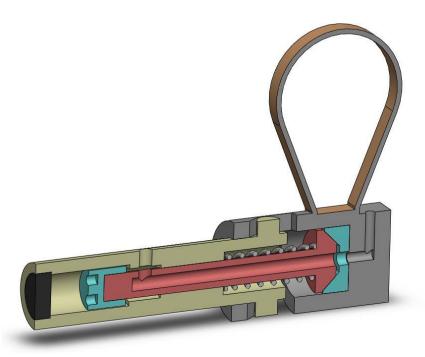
Section view of the bayonet concept with the electrode and electrode carrier mounted on the driving shaft.
